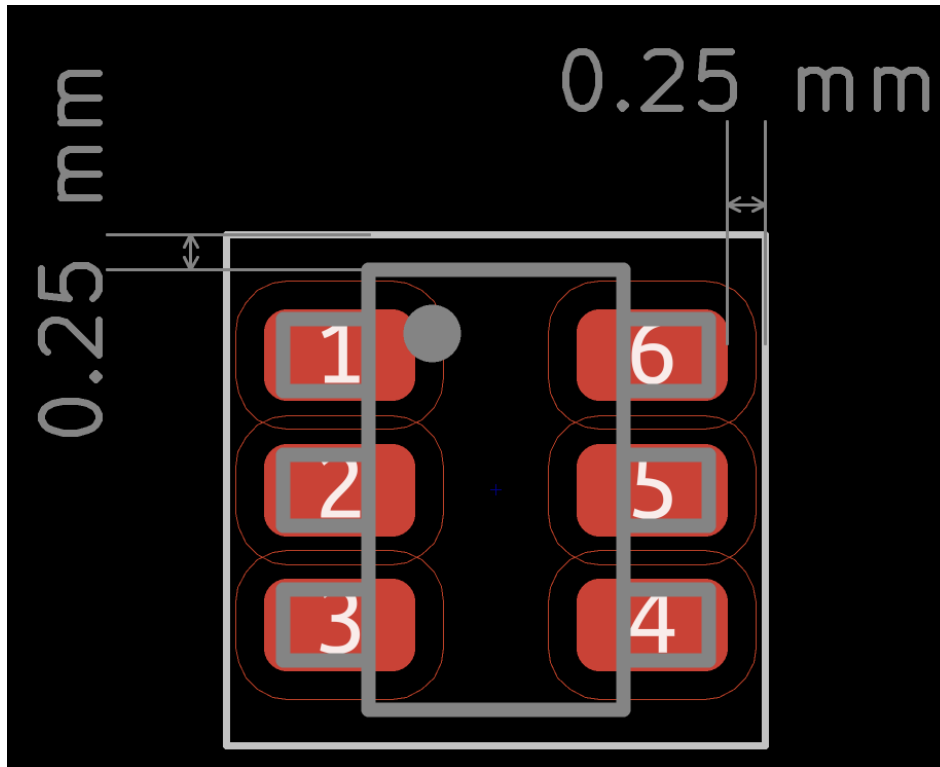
SOT-23-6 footprint with distance from pad to courtyard and fabrication outline to courtyard shown (silkscreen layer hidden for clarity).
